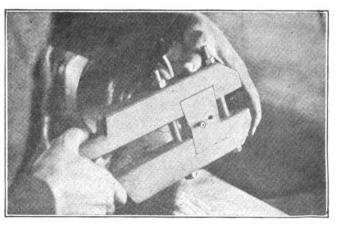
LAPPING OUTSIDE OF SPINDLE
